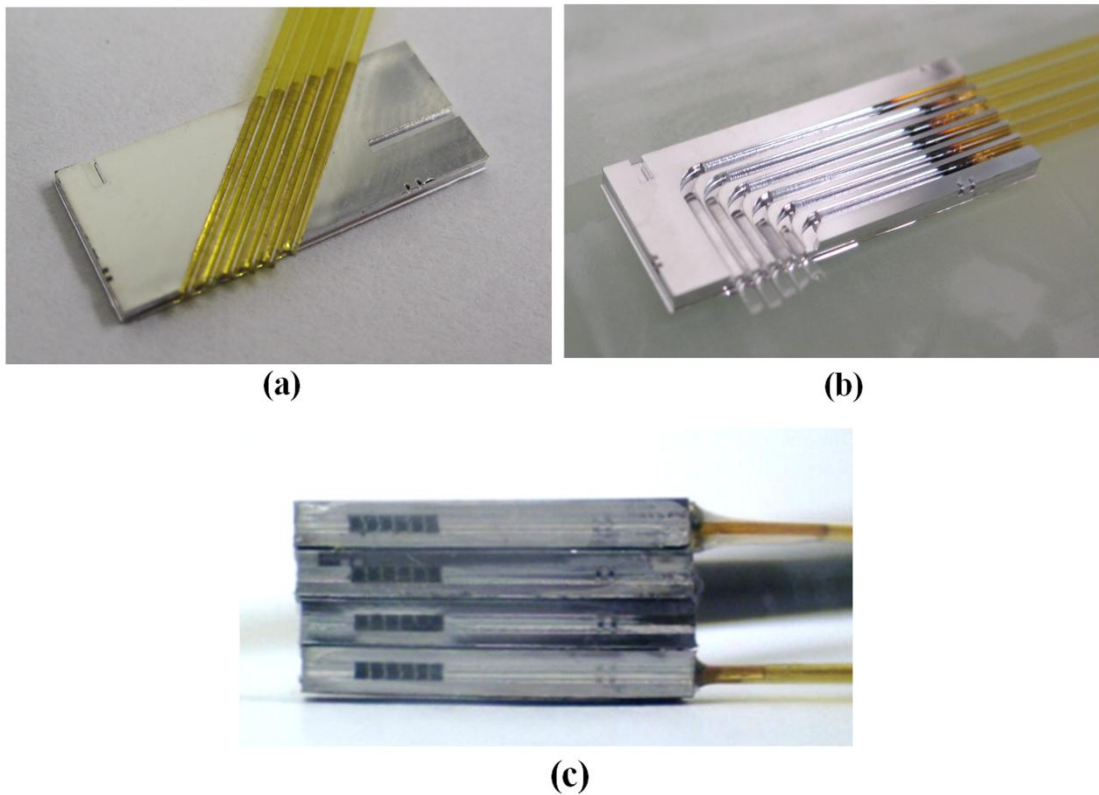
Assembly of the side-viewing VNIR-DRS probe: (a) Source chip; (b) Collection chip; and (c) Assembled probe.
